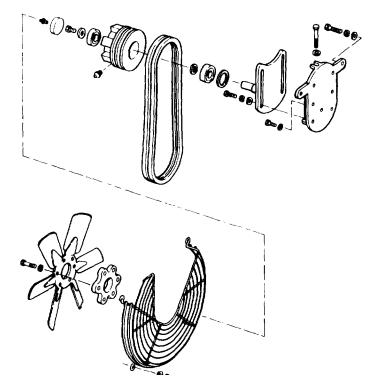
F-17. Fan Hub and Adjusting Bracket Details
